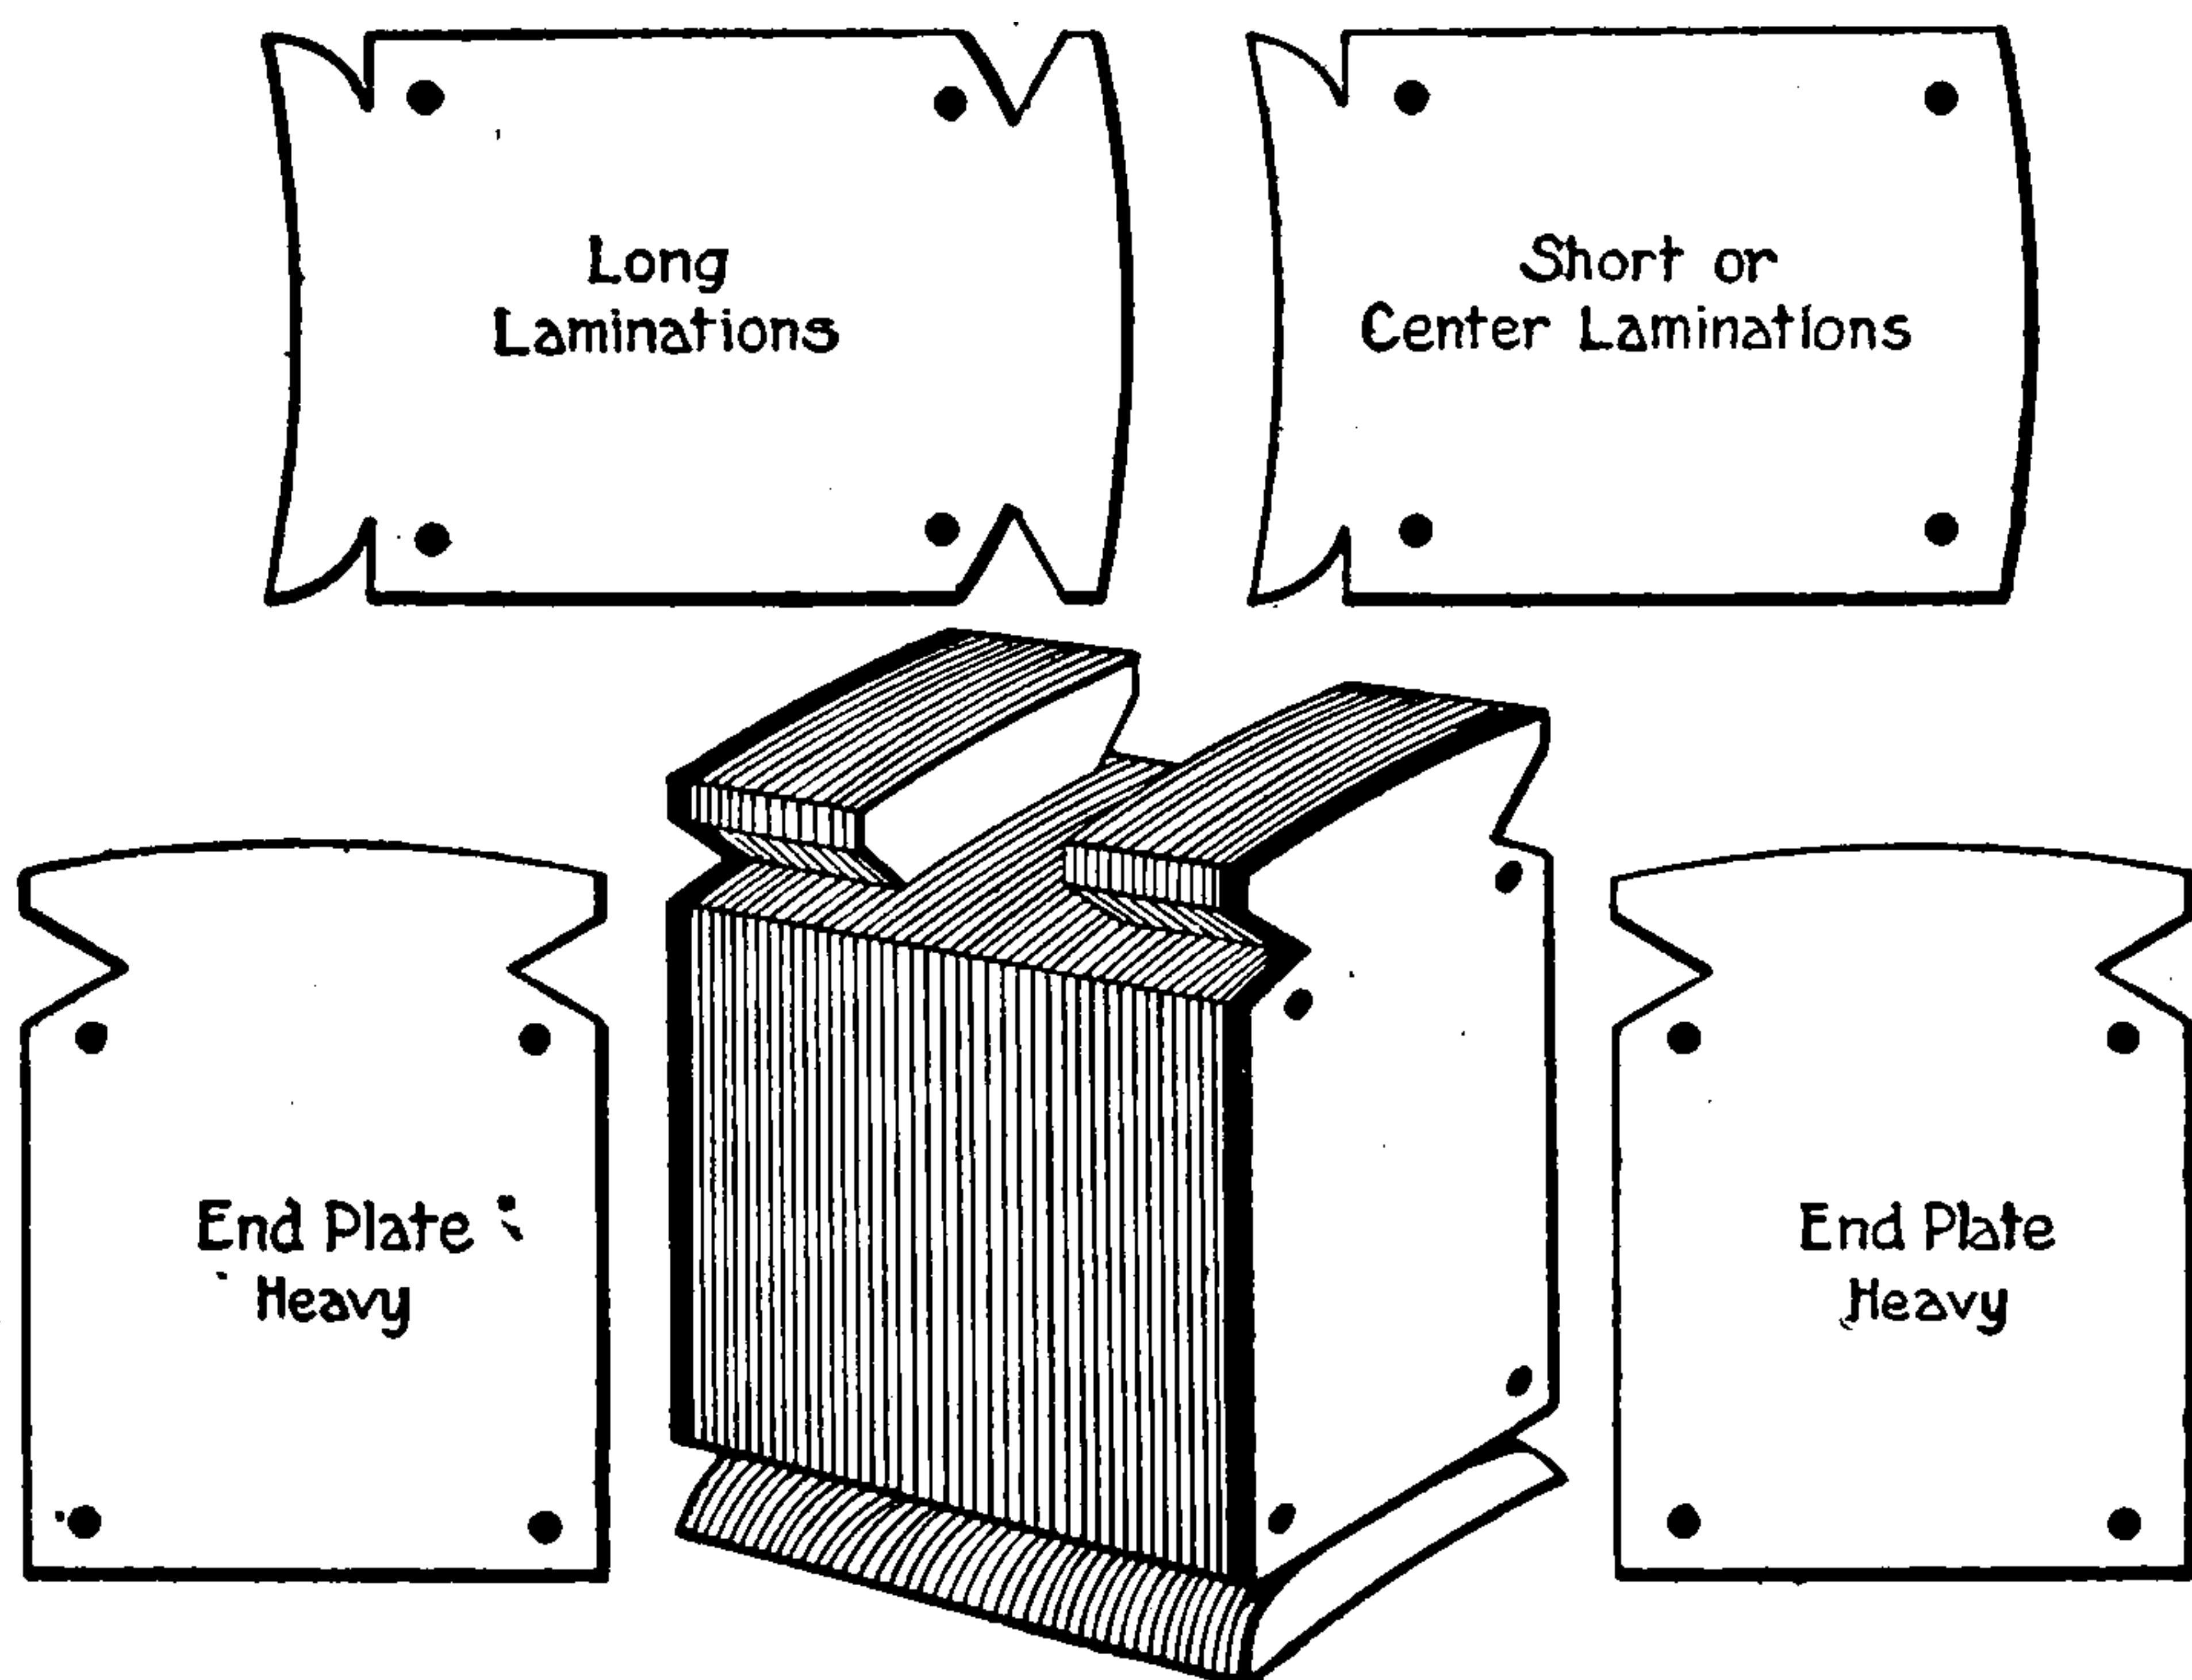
Pole-Core Stampings and Assembled Pole-Piece
